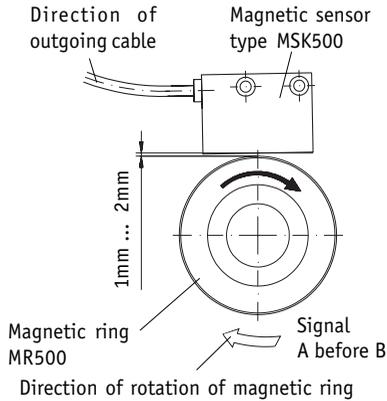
Definition of the counting direction with magnetic ring MSK500 and assemblage of sensor / magnetic ring, gap measures, tolerances
